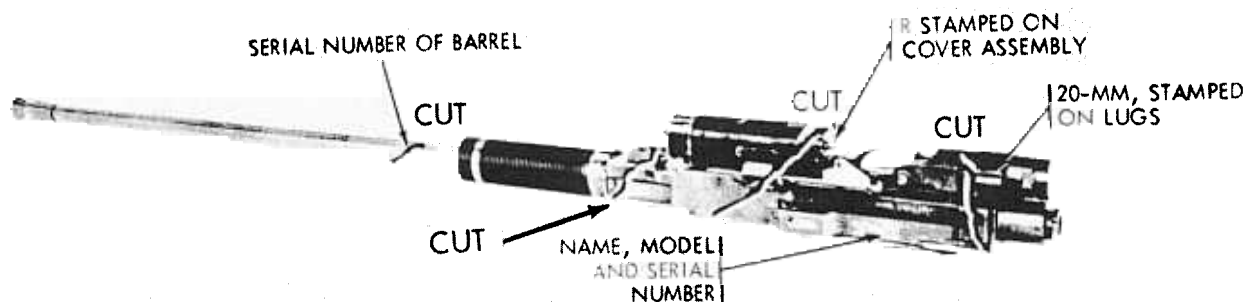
20-MILLIMETER AUTOMATIC GUN M139 WITH AUTOMATIC GUN FEEDER, RECOIL ADAPTER, CONTROLS AND IDENTIFICATION MARKINGS - LEFT REAR VIEW.
